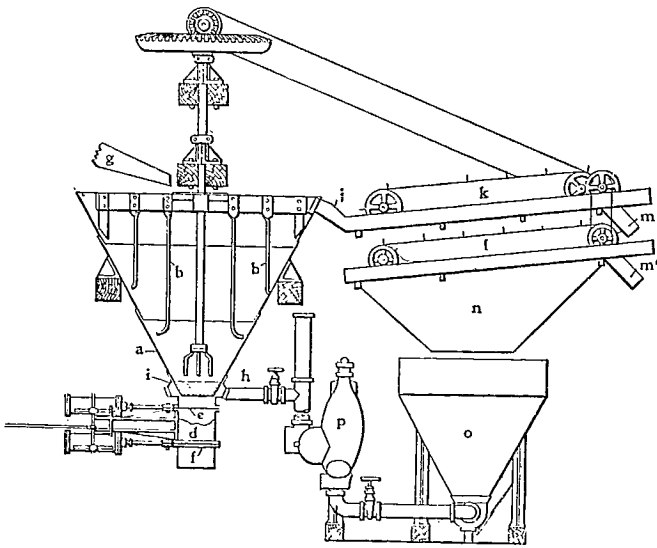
Sectional elevation of Jeffrey-Robinson washer.
